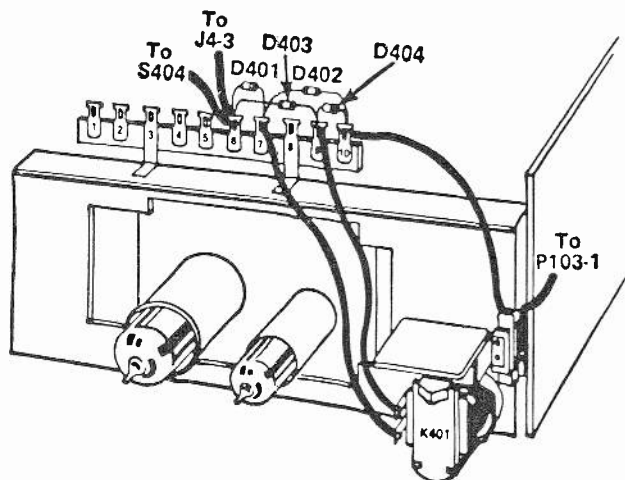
Tuner assembly removed from cabinet to show component location of early production circuit.
